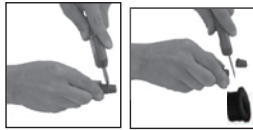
You are now ready to make connection between GTO cable and electrode using either Wetbits Short Sleeve or Wetbits End Cap. Make sure to leave at least 1/4 in. of GTO cable and WB3760 assembly standing out for connection with Wet Bits End Cap Wide.
